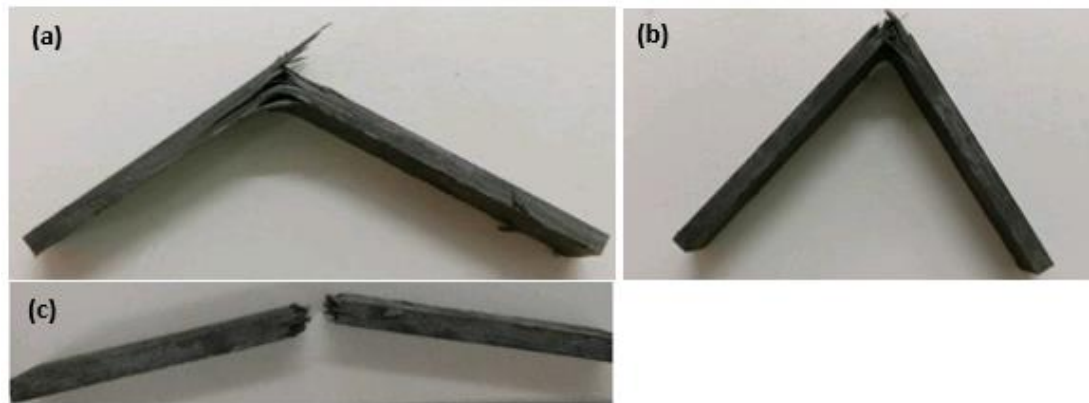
Fractures of RTM moulded DCFP parts after Charpy impact test: Fibre1 (a); Fibre2 (b); and Fibre4 (c) (Original specimen size: 80mm×10mm×2.7mm)
